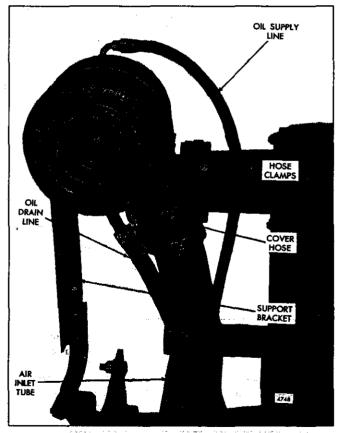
Turbocharger Support Bracket, Oil Lines and Air Inlet Tube
